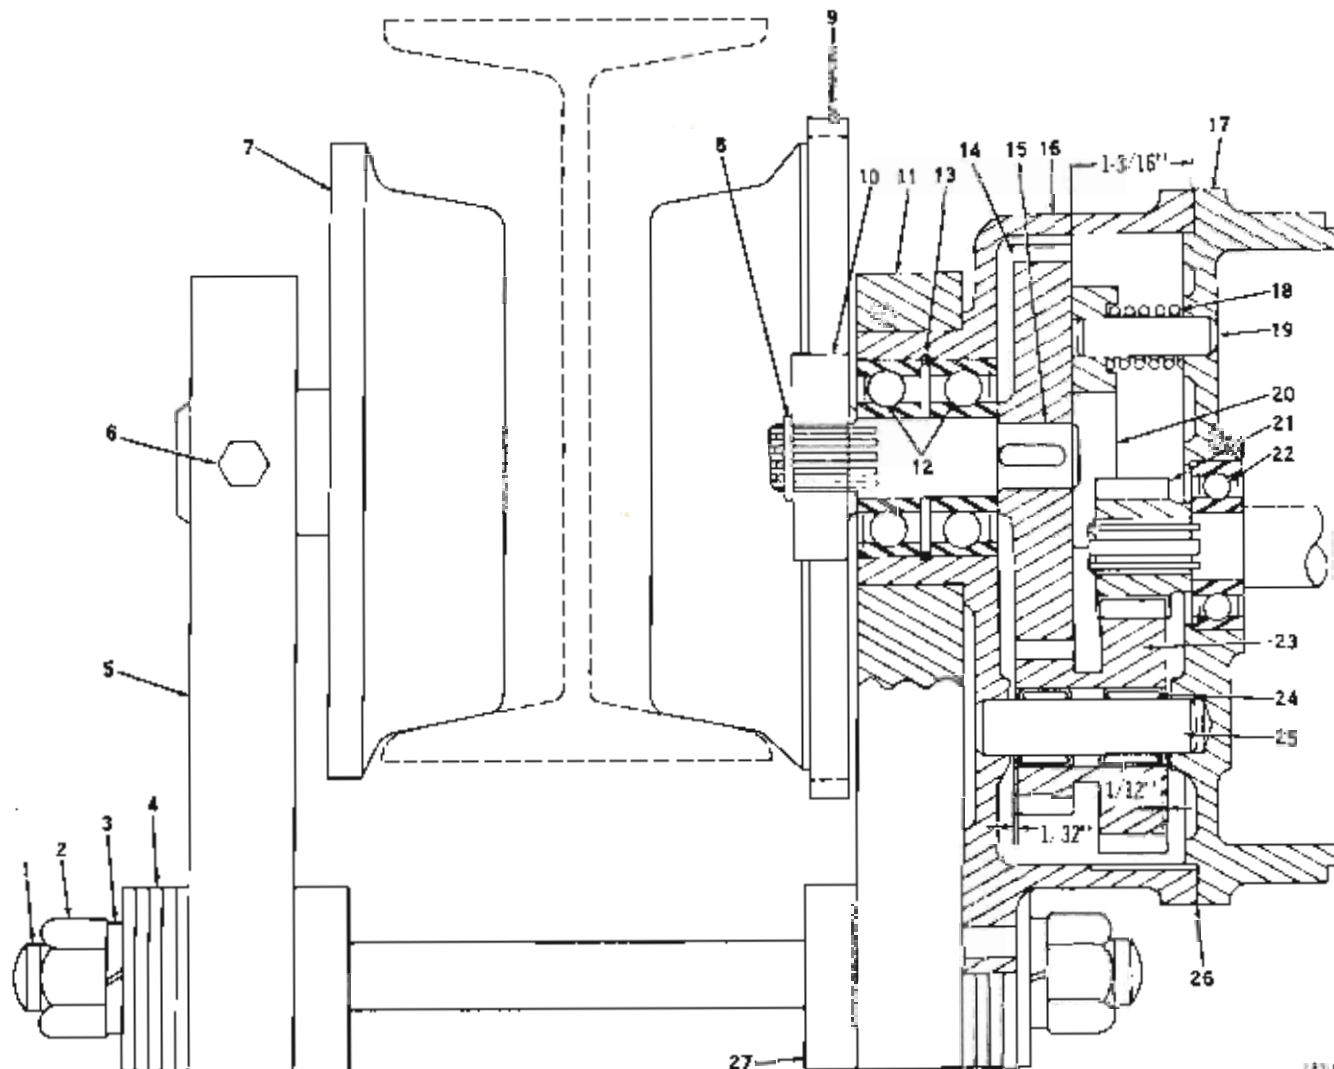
Cross Sectional View of Motor Geared Trolley Assembly
